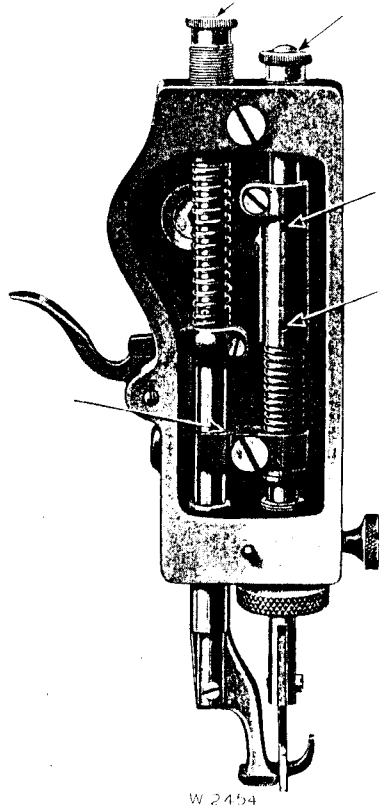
END VIEW OF MACHINE, SHOWING OILING POINTS
